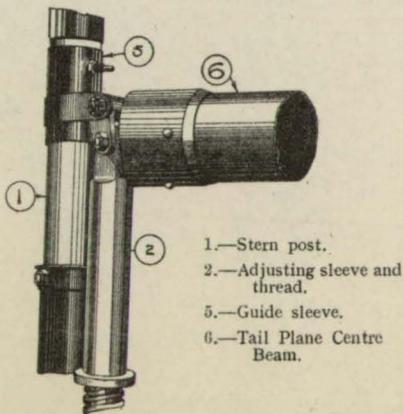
Attachment of adjusting sleeve to stabilizer center beam
